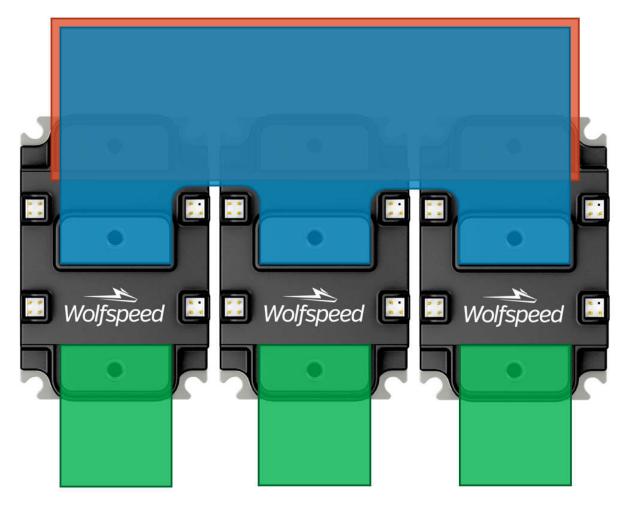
Illustration Showing Three-Phase Bussing Layout
